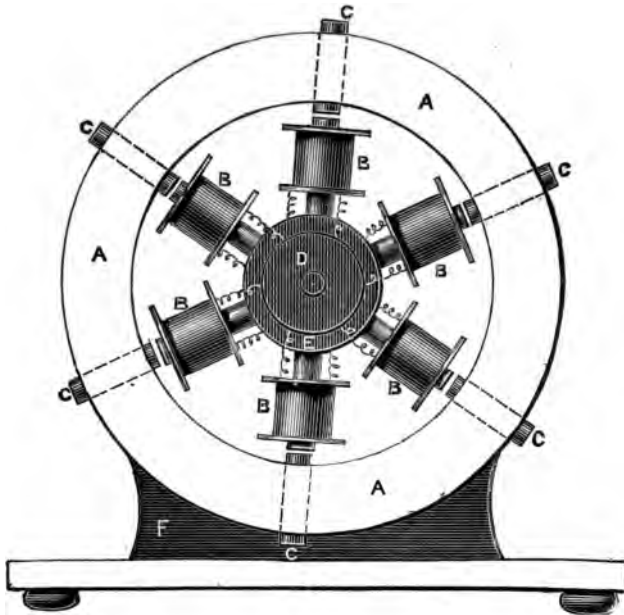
ELECTRO-MOTIVE ENGINE.
